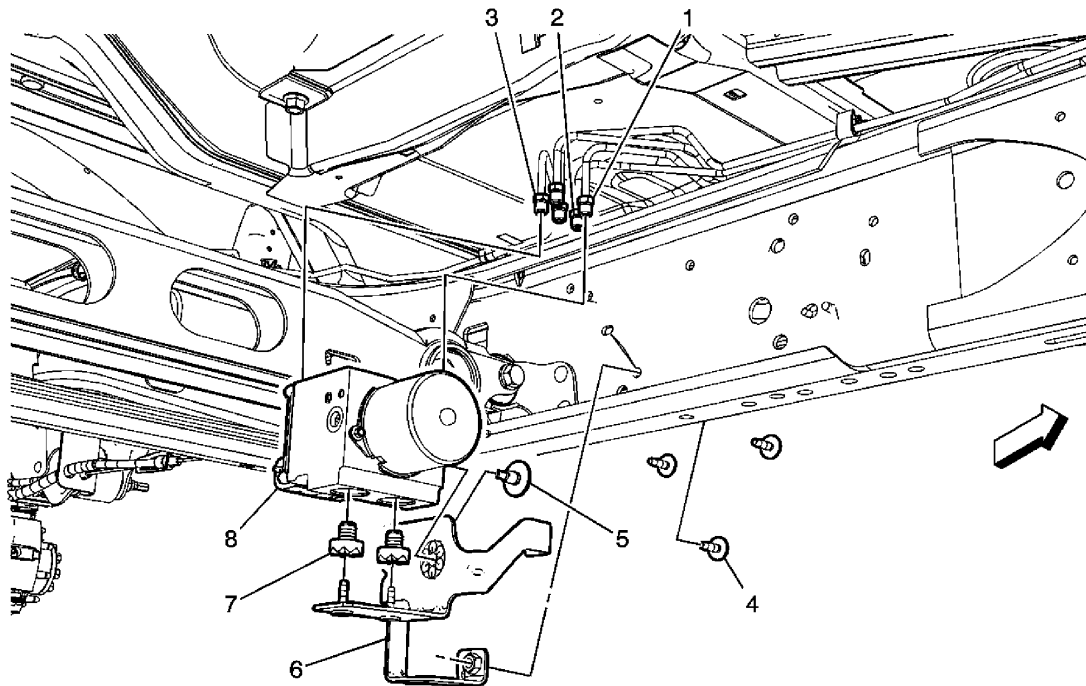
View Of Brake Pressure Modulator Valve & Components
